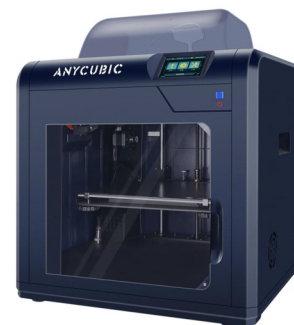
The 3D printer - Anycubic 4 Max Pro 2.0, used to manufacture of tensile specimens from ASA through FDM.
